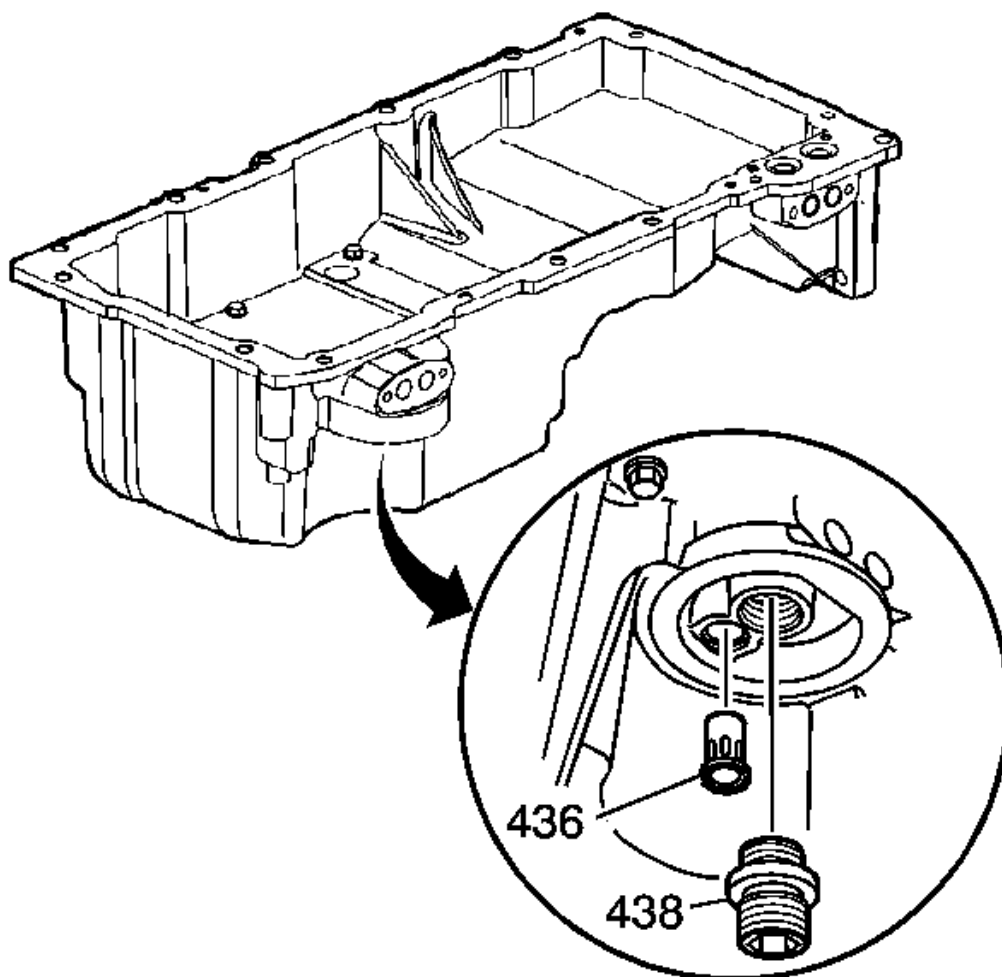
Identifying Oil Filter Fitting & Bypass Valve
